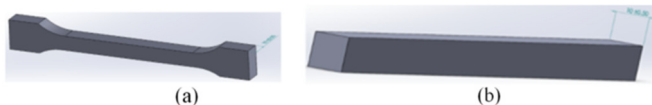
Specimens for (a) tensile test, (b) Izod impact test.
